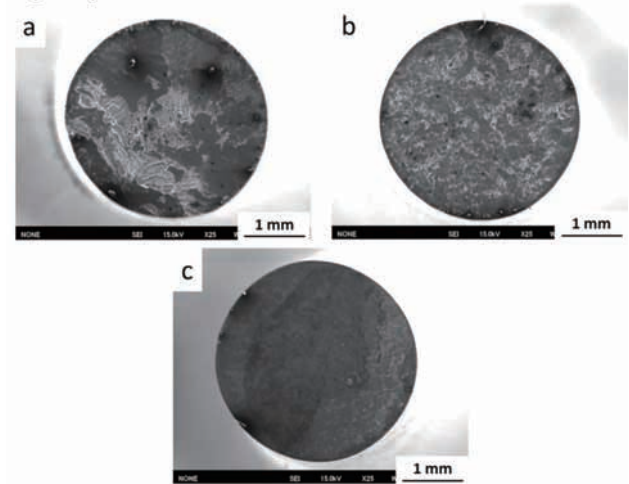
Fracture surfaces of Ti/Mg alloys bonded for 2 hrs (Mg alloys side) a) AZ61 b) AZ80 and c) AZ91.
